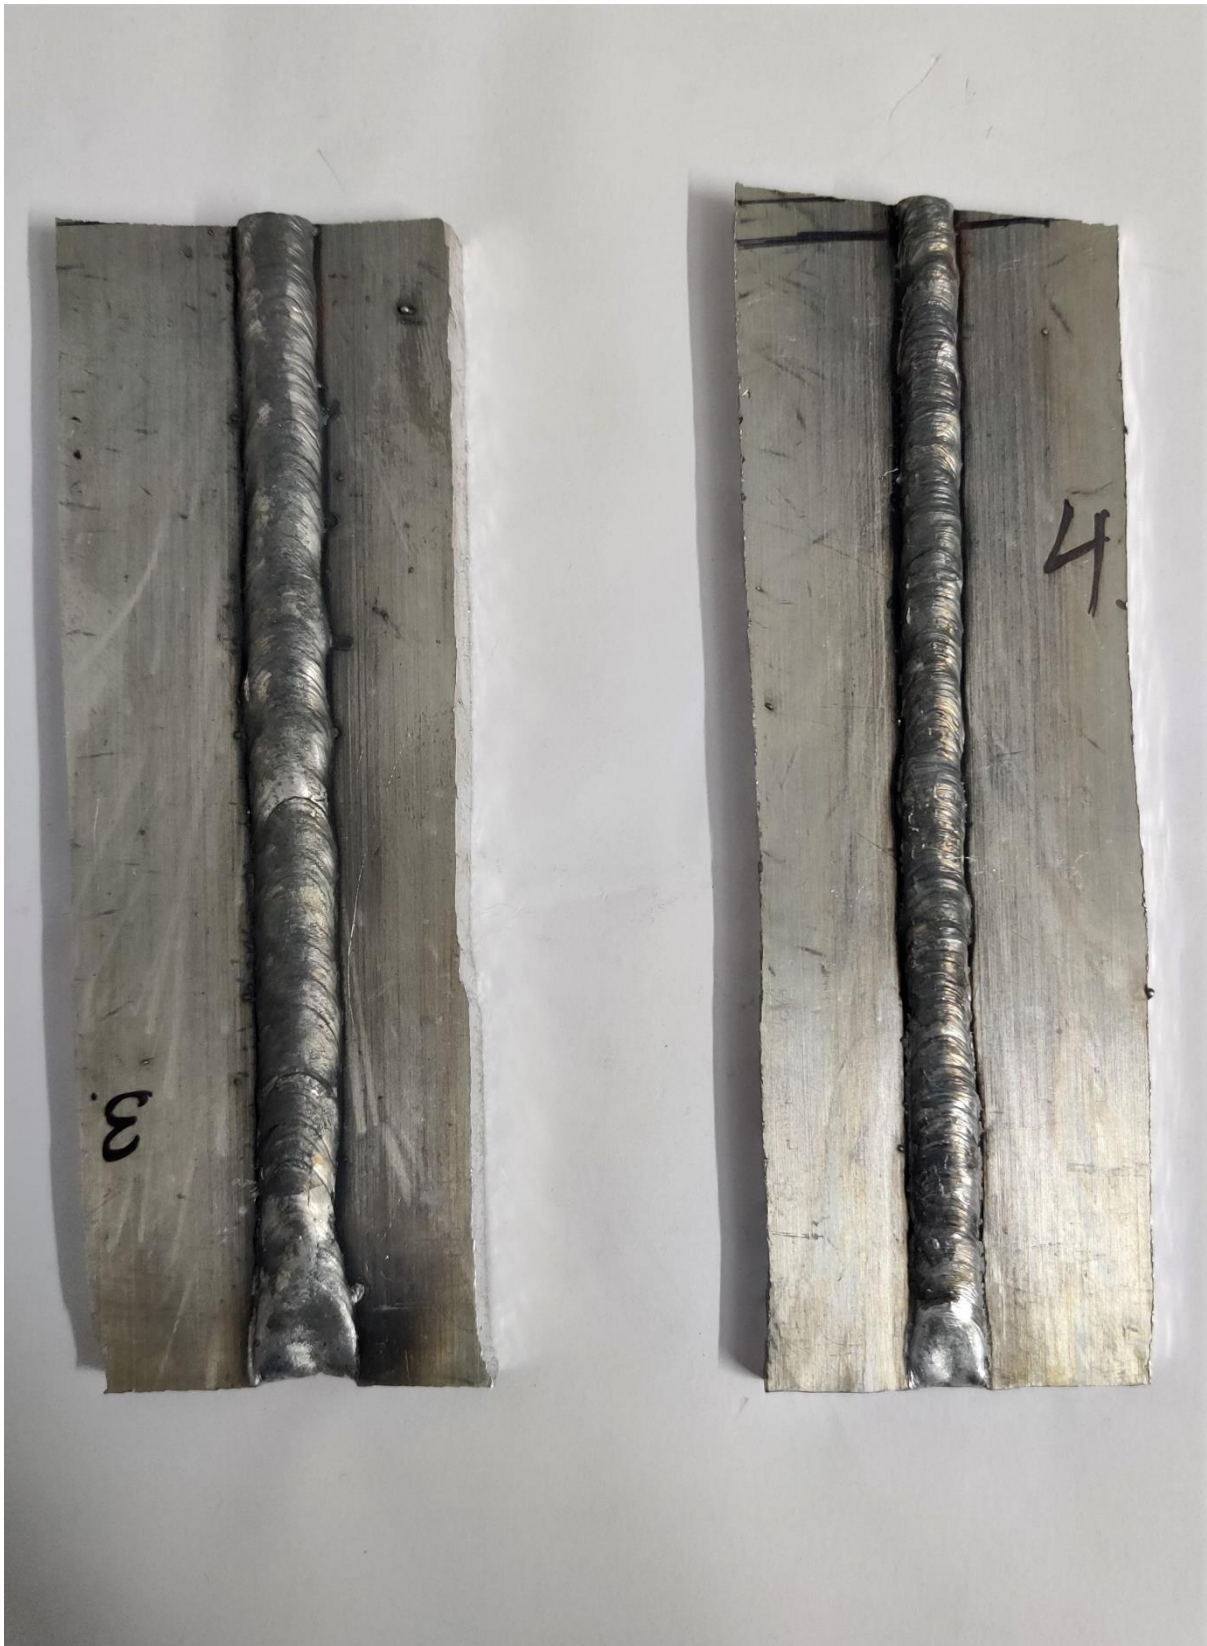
Weld bead obtained by run no. 3 & 4
